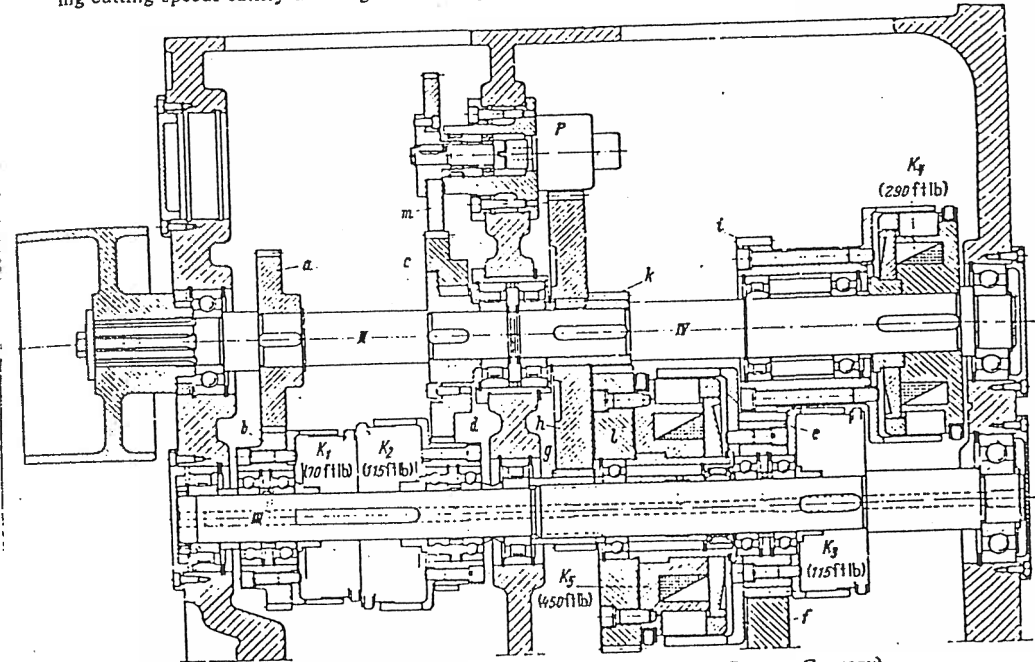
Spindle head gearbox of a turret lathe (Gebr. Heinemann, St. Georgen, Germany).
